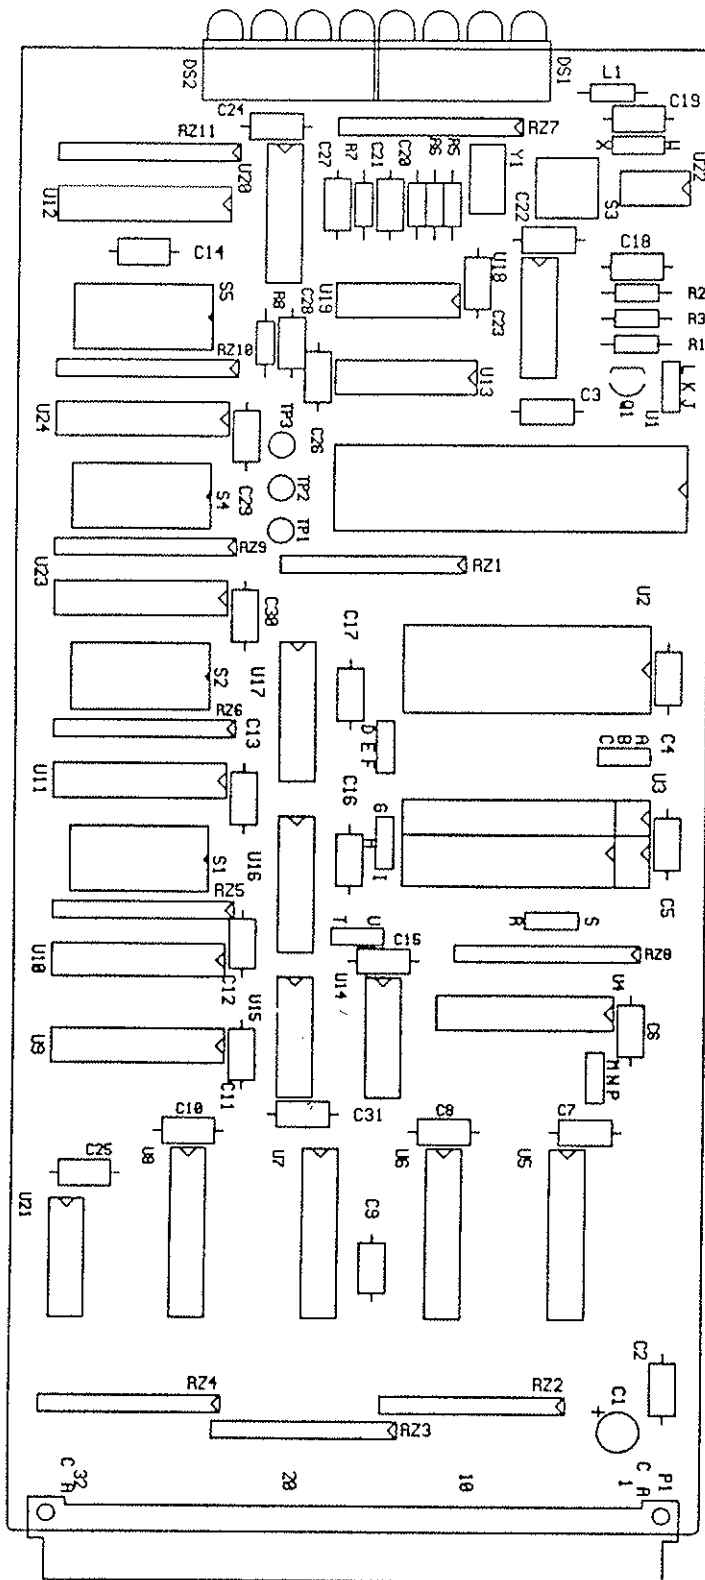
Component locator drawing, RFL 97A RX CPU Receiver CPU Module
